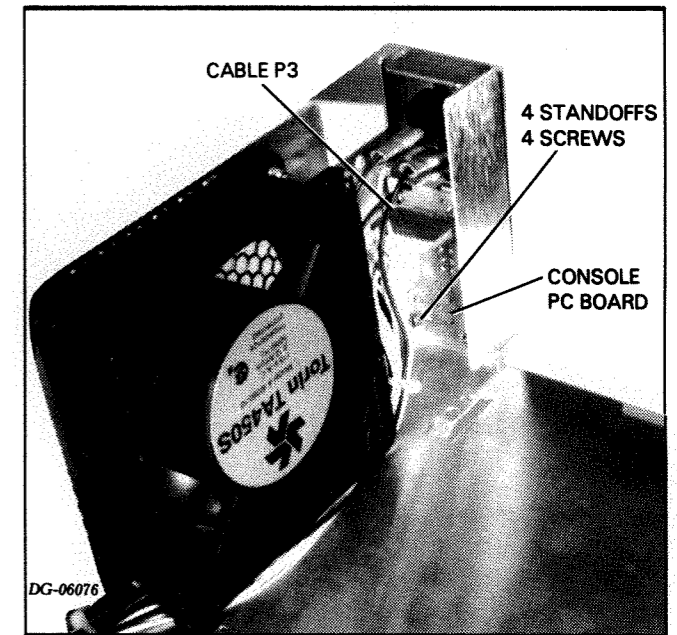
CONSOLE PC BOARD (5-SLOT CHASSIS)
